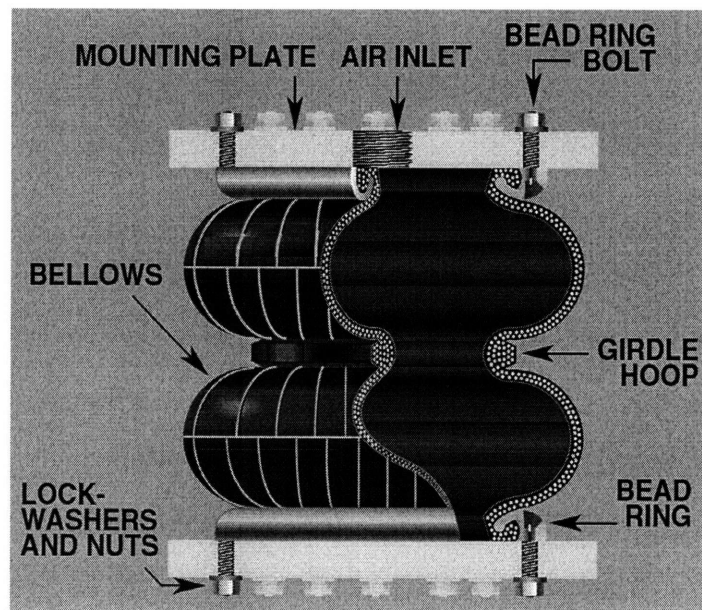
Convoluted air-spring with bead rings (Firestone 2005)
